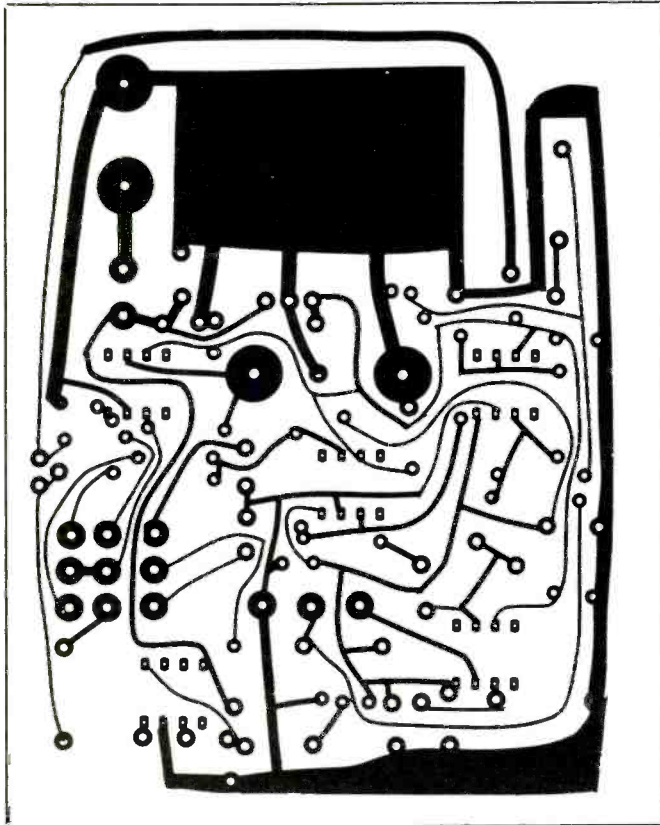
Actual-size etching-and-drilling guide for main printed-circuit board.
